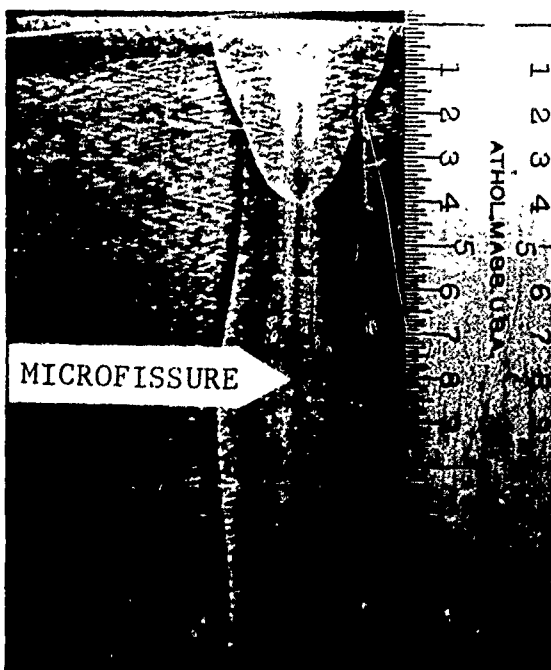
MACRO AND MICRO STRUCTURE OF EB WELDED .500 INCH THICK 10 Ni STEEL (WELD NO. H10)
